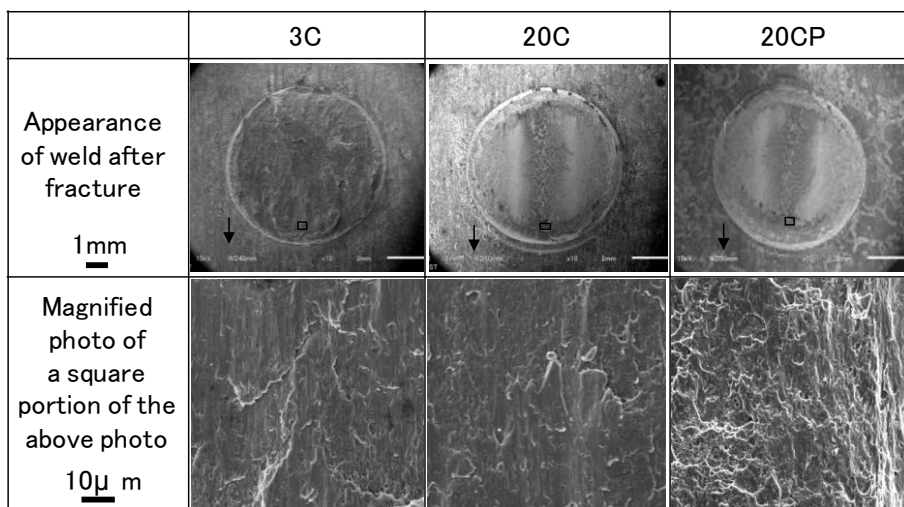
SEM photographs of fractured surface for the specimens after tensile test.
